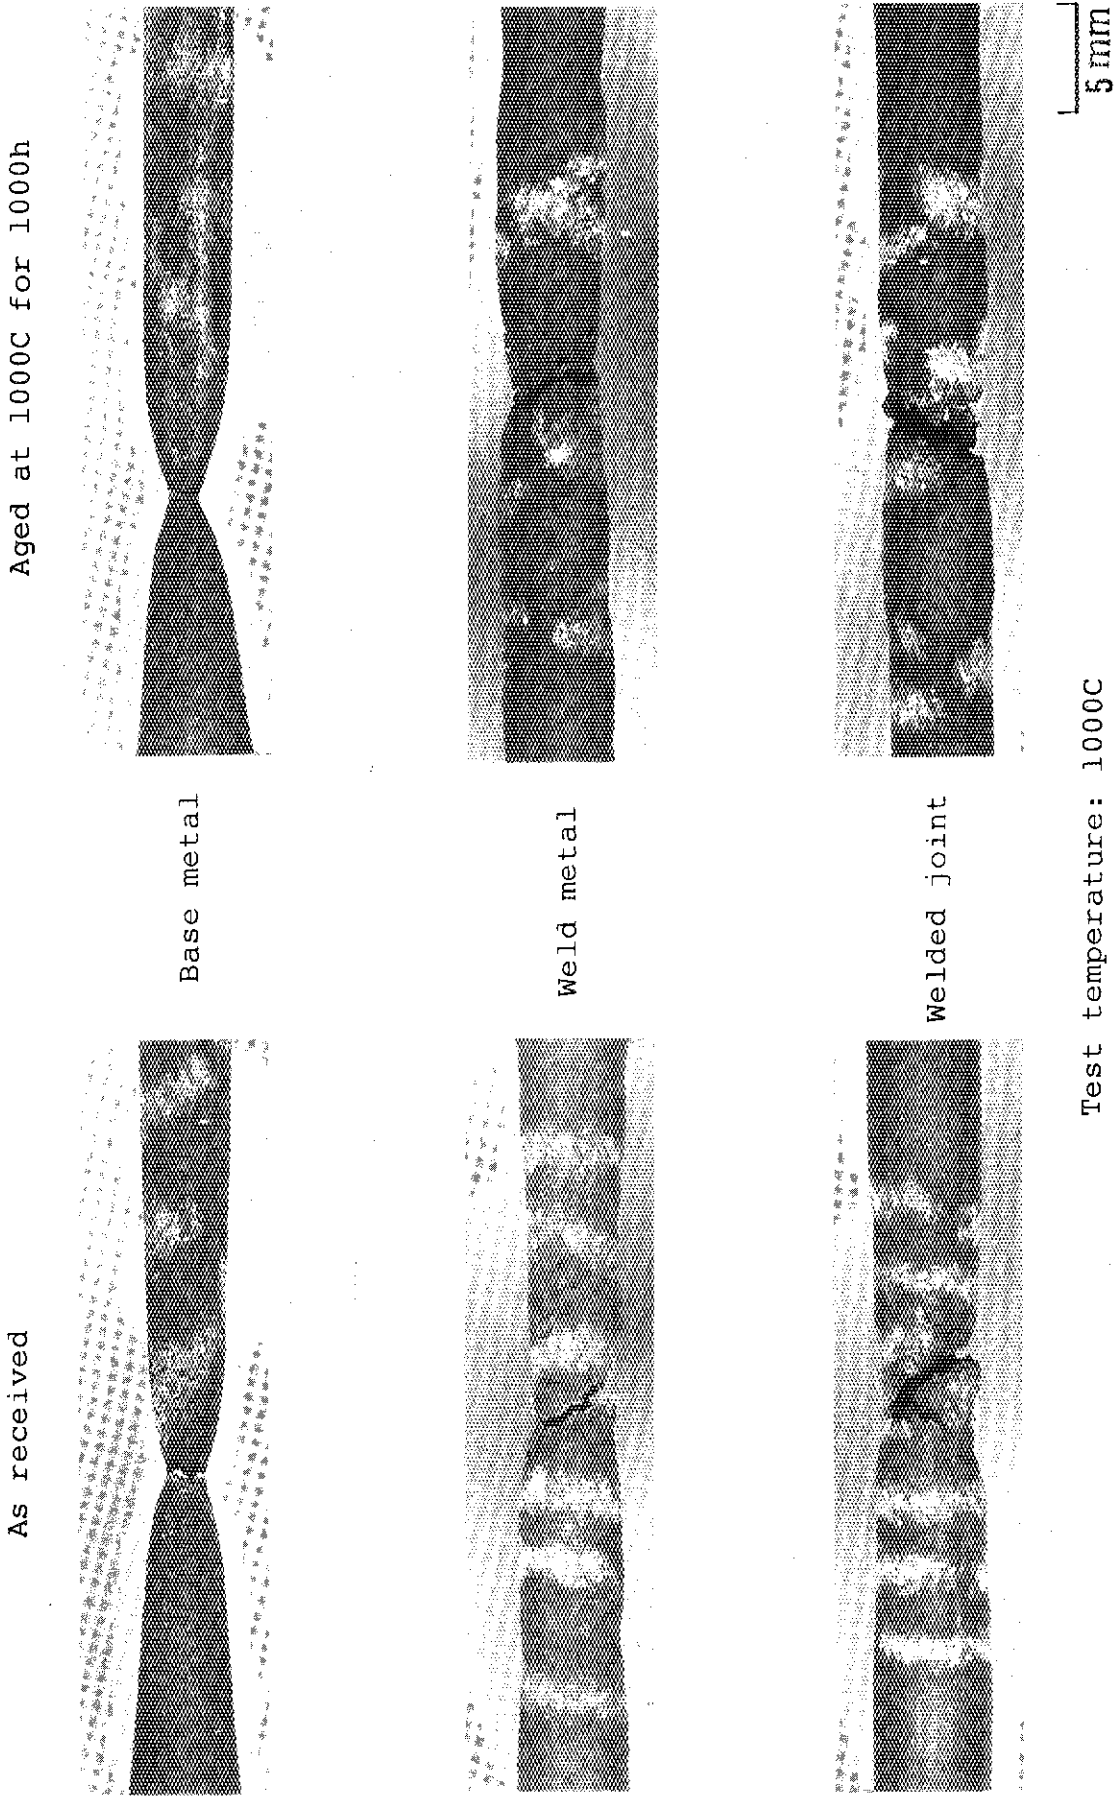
View of fracture portion of base metal and weldments after aging at 1000°C for 1000h
